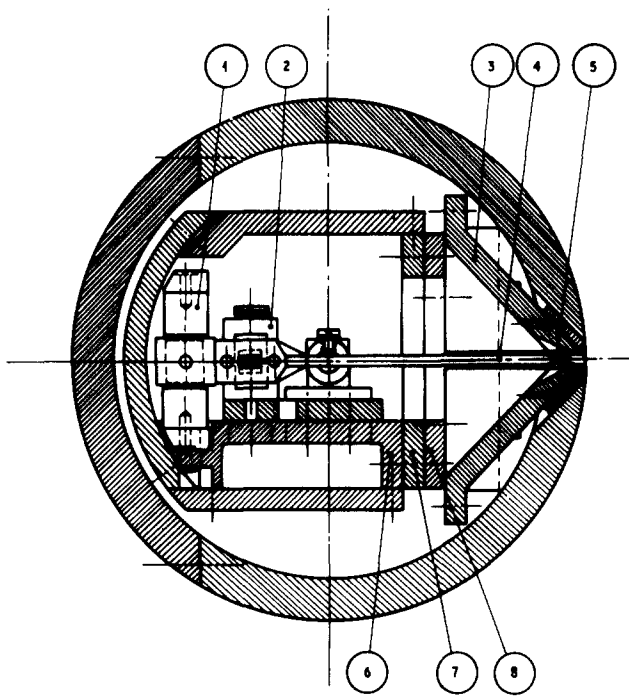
Schematic diagram of the assembled device. (1) electromagnetic coils; (2) photoelectric system; (3) supporting frame; (4) movable assembly; (5) side spacers; (6) adjustable carrier; (7) & (8) sliding adjustable frames
